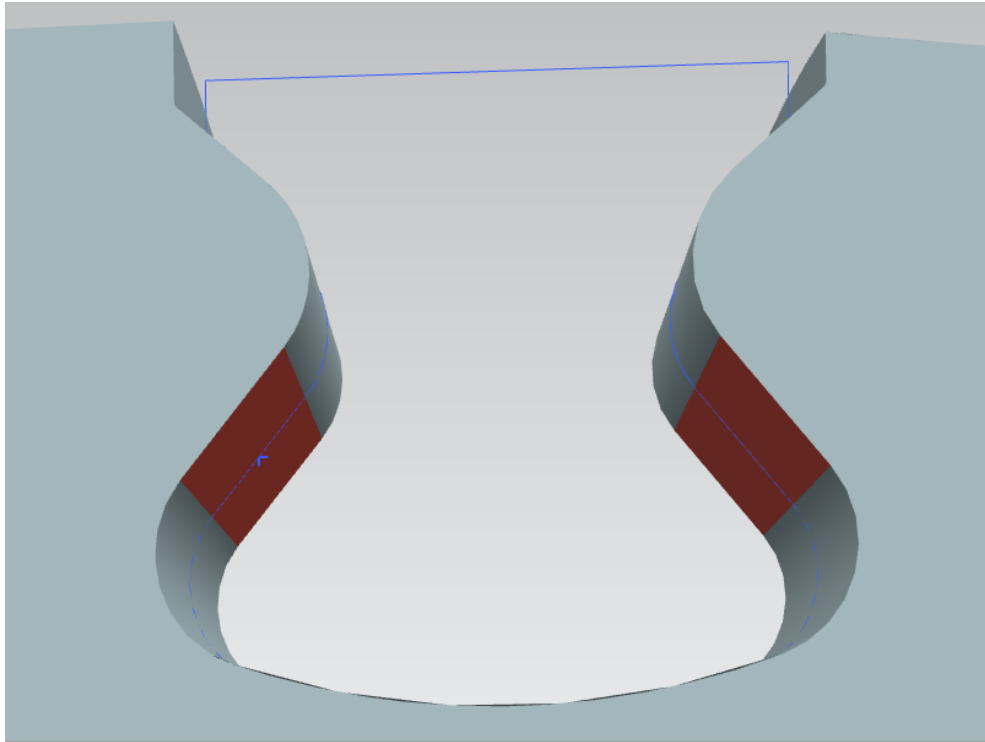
Compressor wheel groove (dovetail-type) showing the pressure surfaces highlighted in red.
